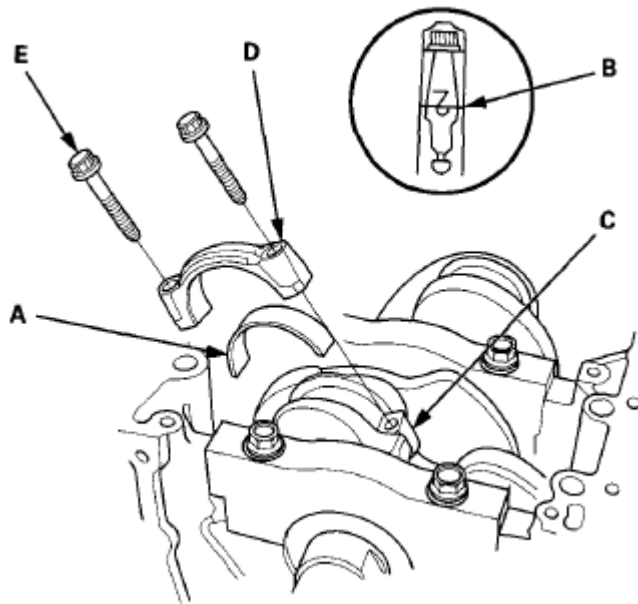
Identifying Bearing, Connecting Rod, Rod Cap, Bearing Mark And Bolts
